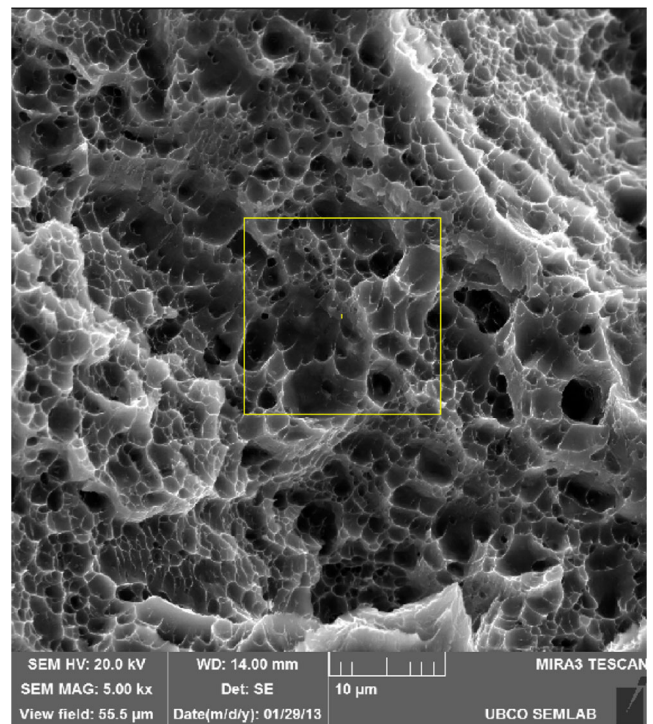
Low ductility fracture in some regions of sample 3n or hot weld ($\times 5,000$)
